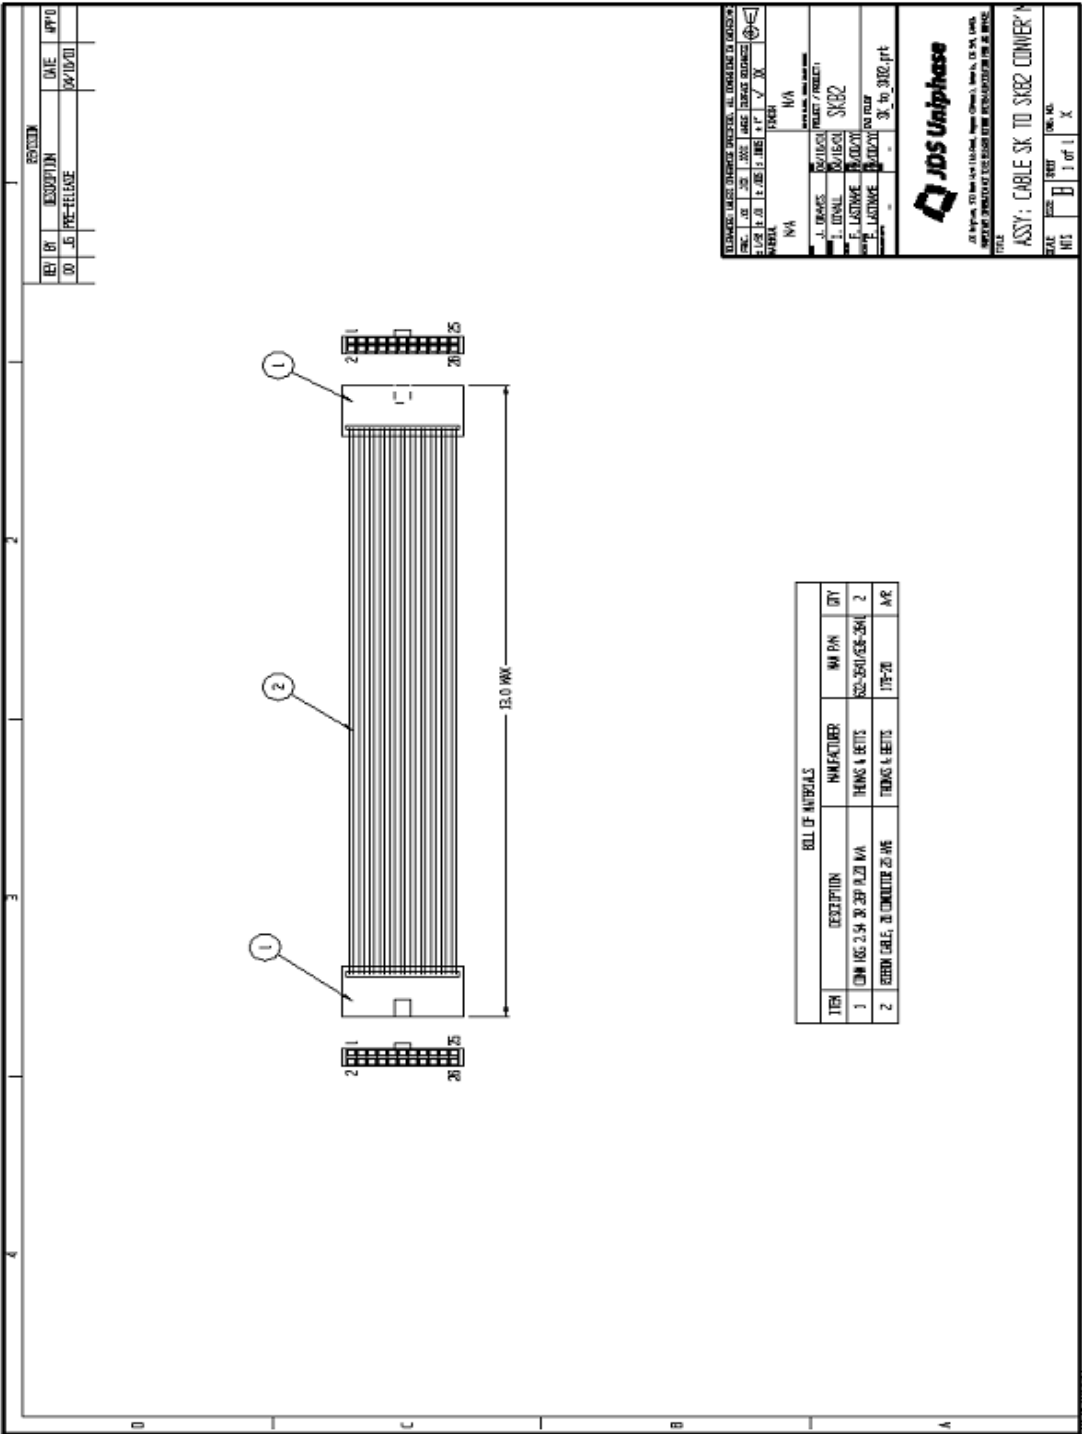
SKB to SK/SP Adapter Cable Assembly Drawing
